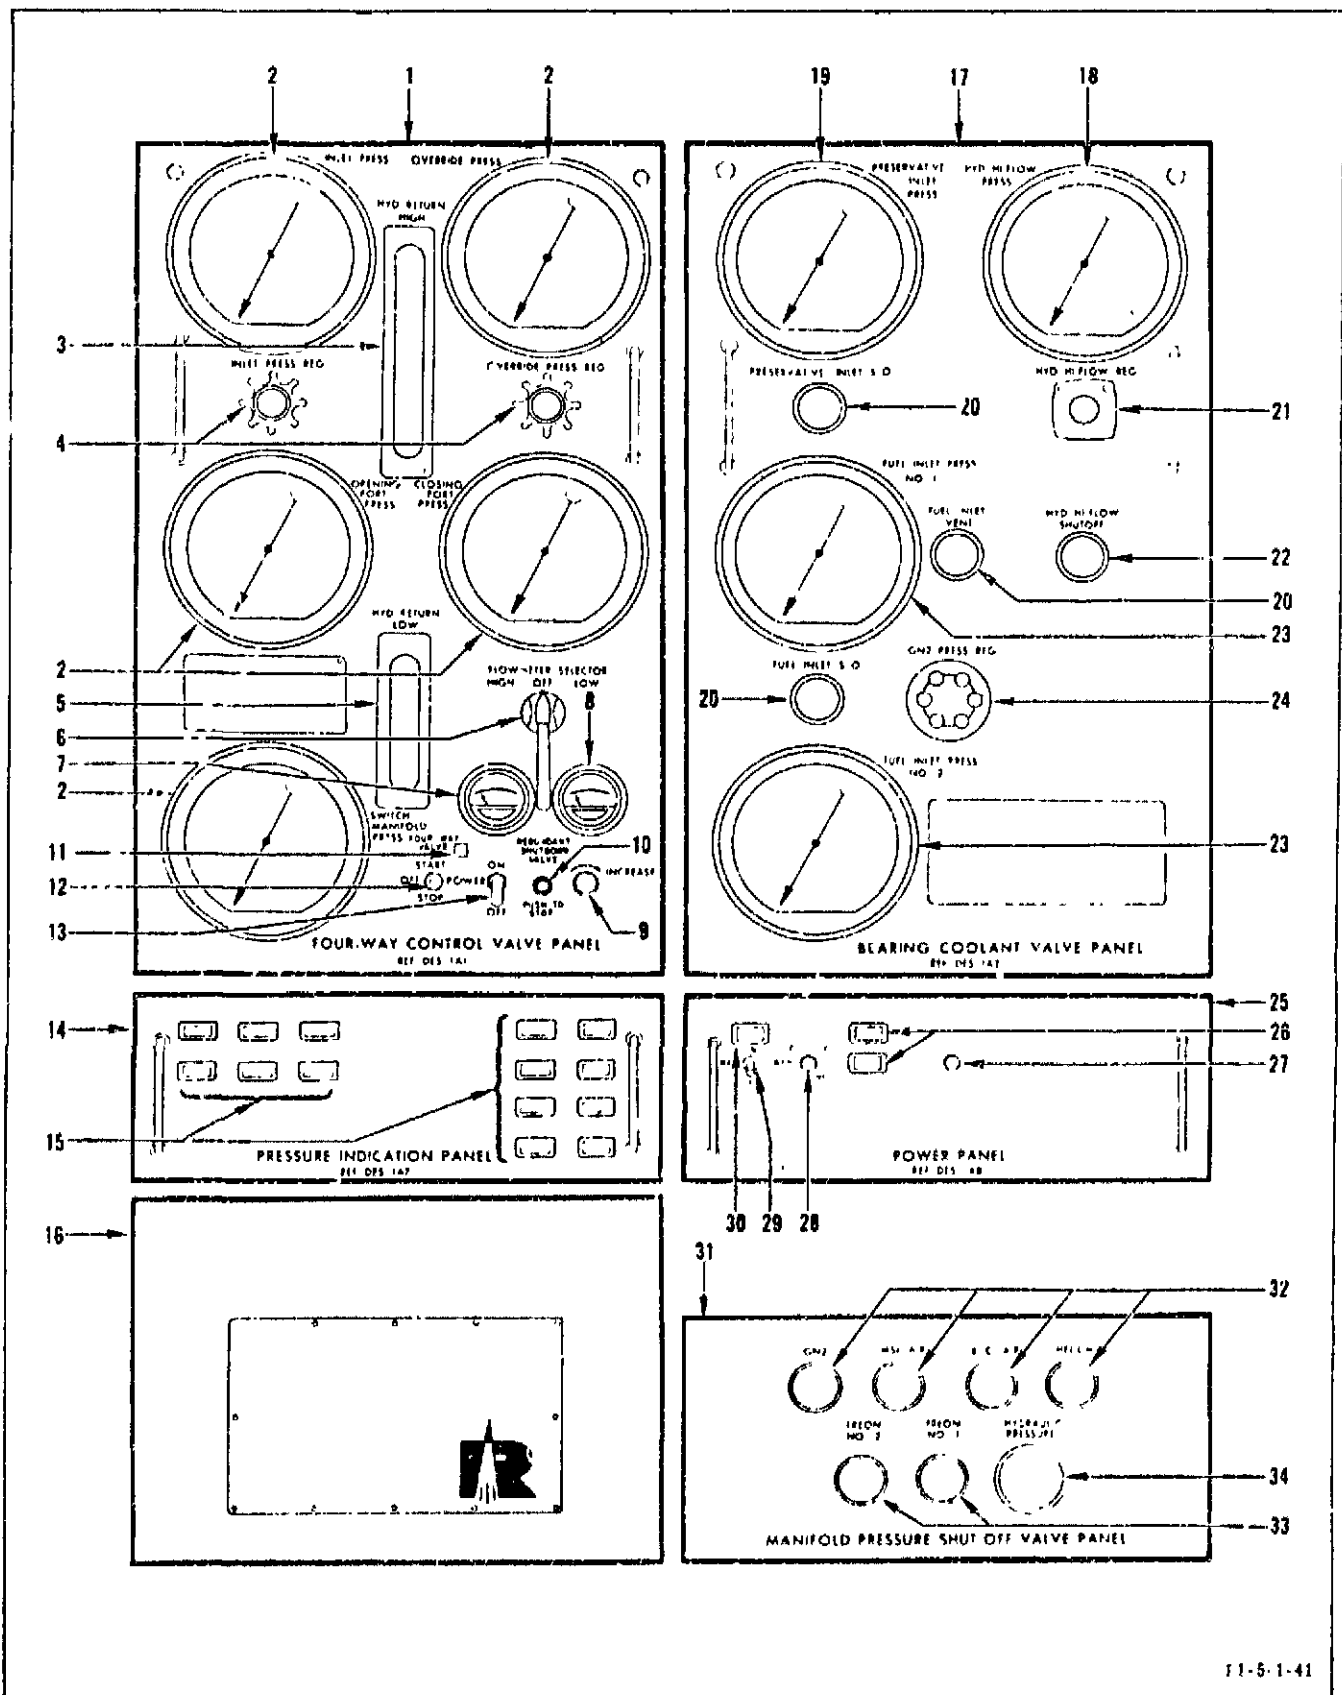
Disassembly of Engine Checkout Console (Sheet 1 of 20)
